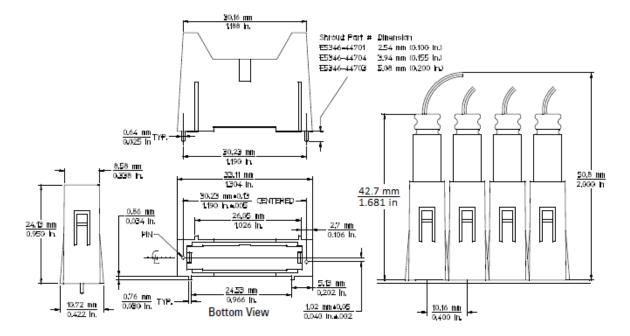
Support shroud dimensions for the MICTOR 38-pin connector
